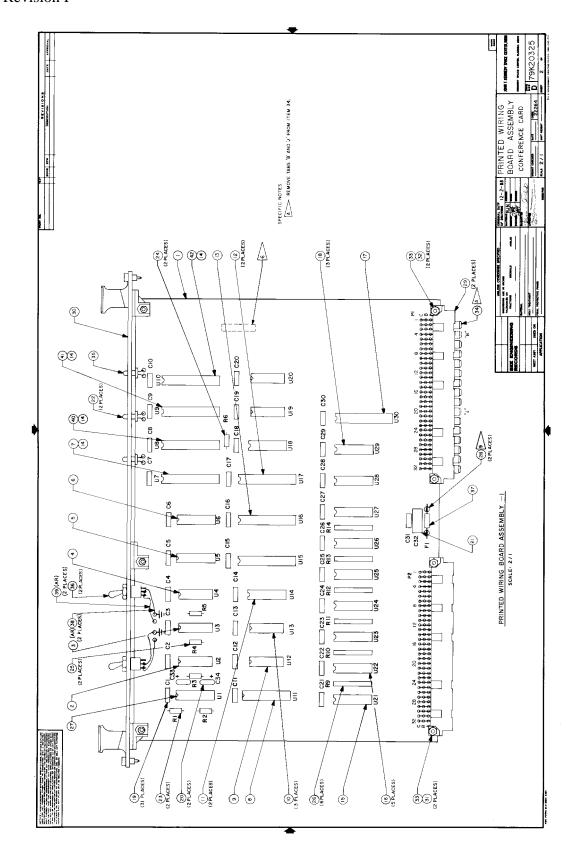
Typical Printed-Wiring Assembly Drawing
